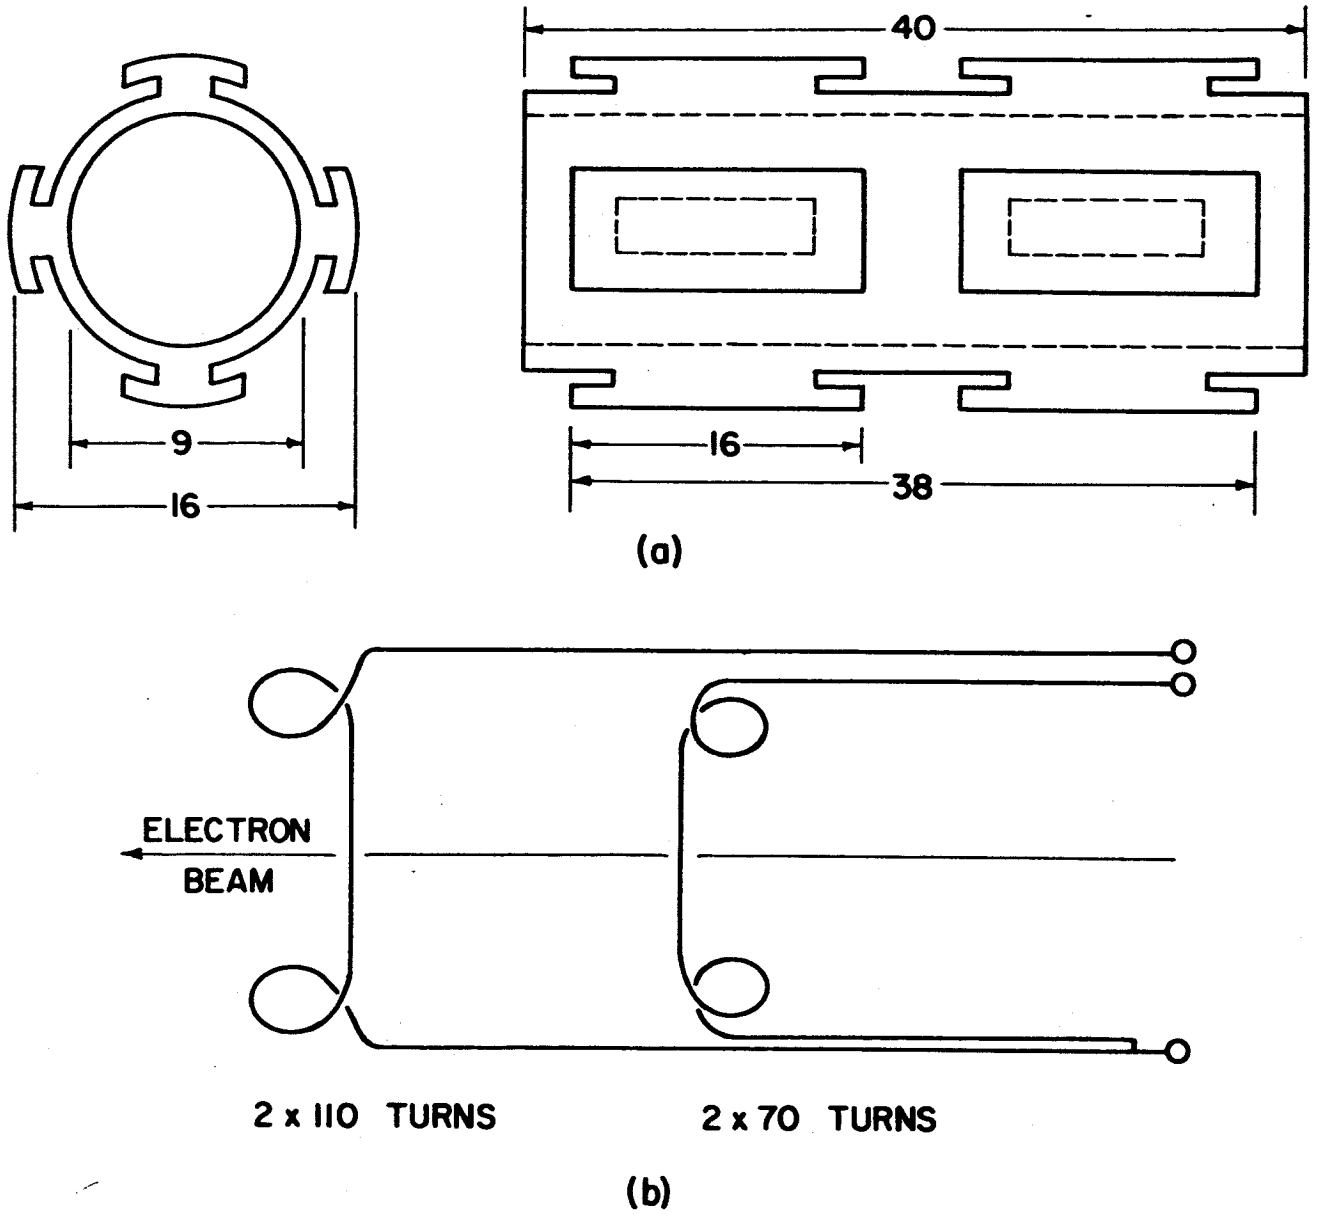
(a) Construction of Brass Former for Tilt Coils. Dimensions in Millimeters. (b) Winding for Vertical or Horizontal Coils.
